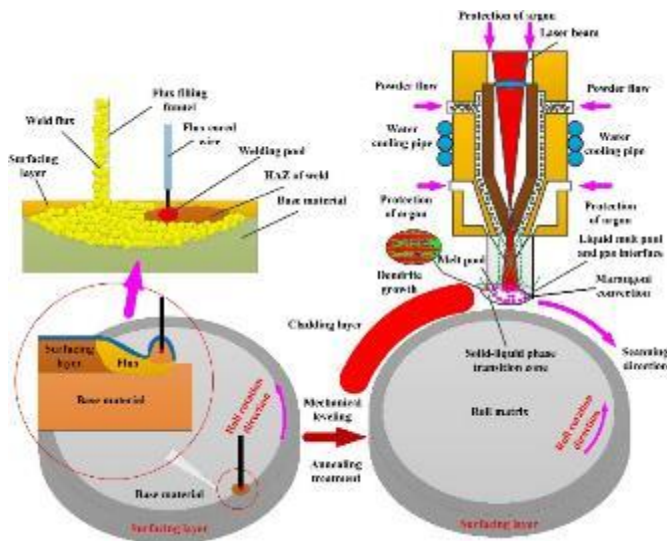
Composite process diagram of surfacing welding and laser cladding[9]
